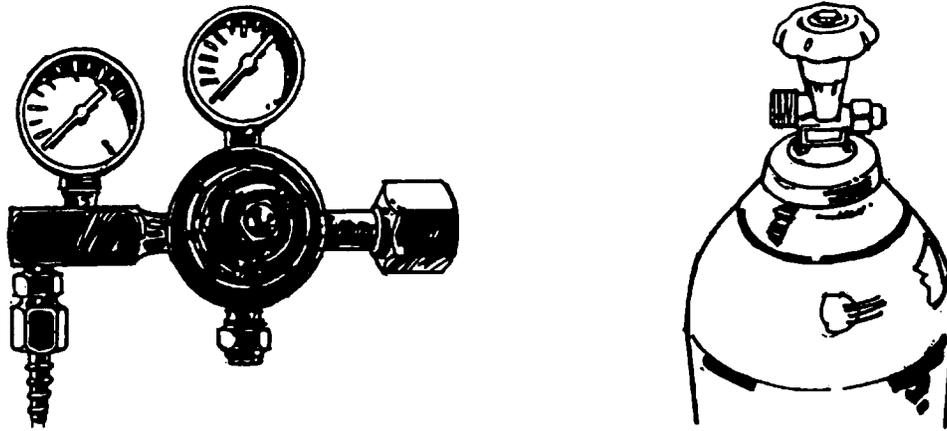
Threaded regulator and gauges for use with commercial-welding K-size oxygen cylinder.
